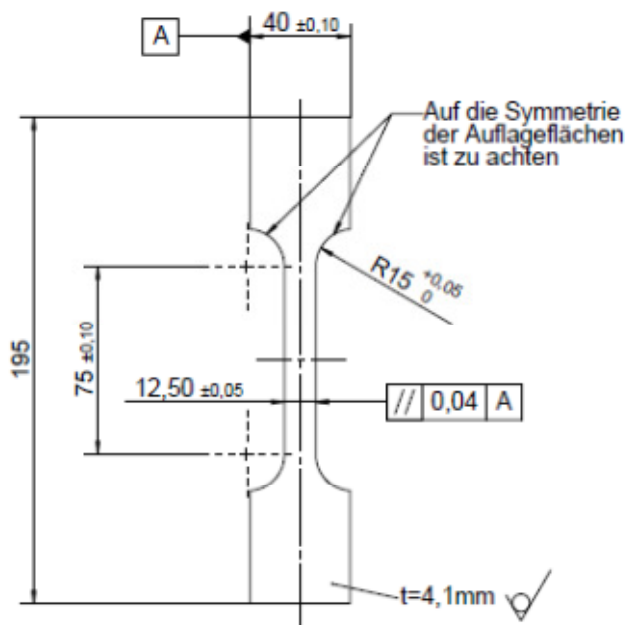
Tensile and relaxation test specimen extracted from sheet metal
